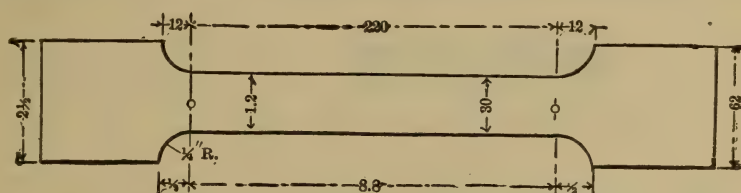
TEST-PIECE FOR FLAT SPECIMENS.
